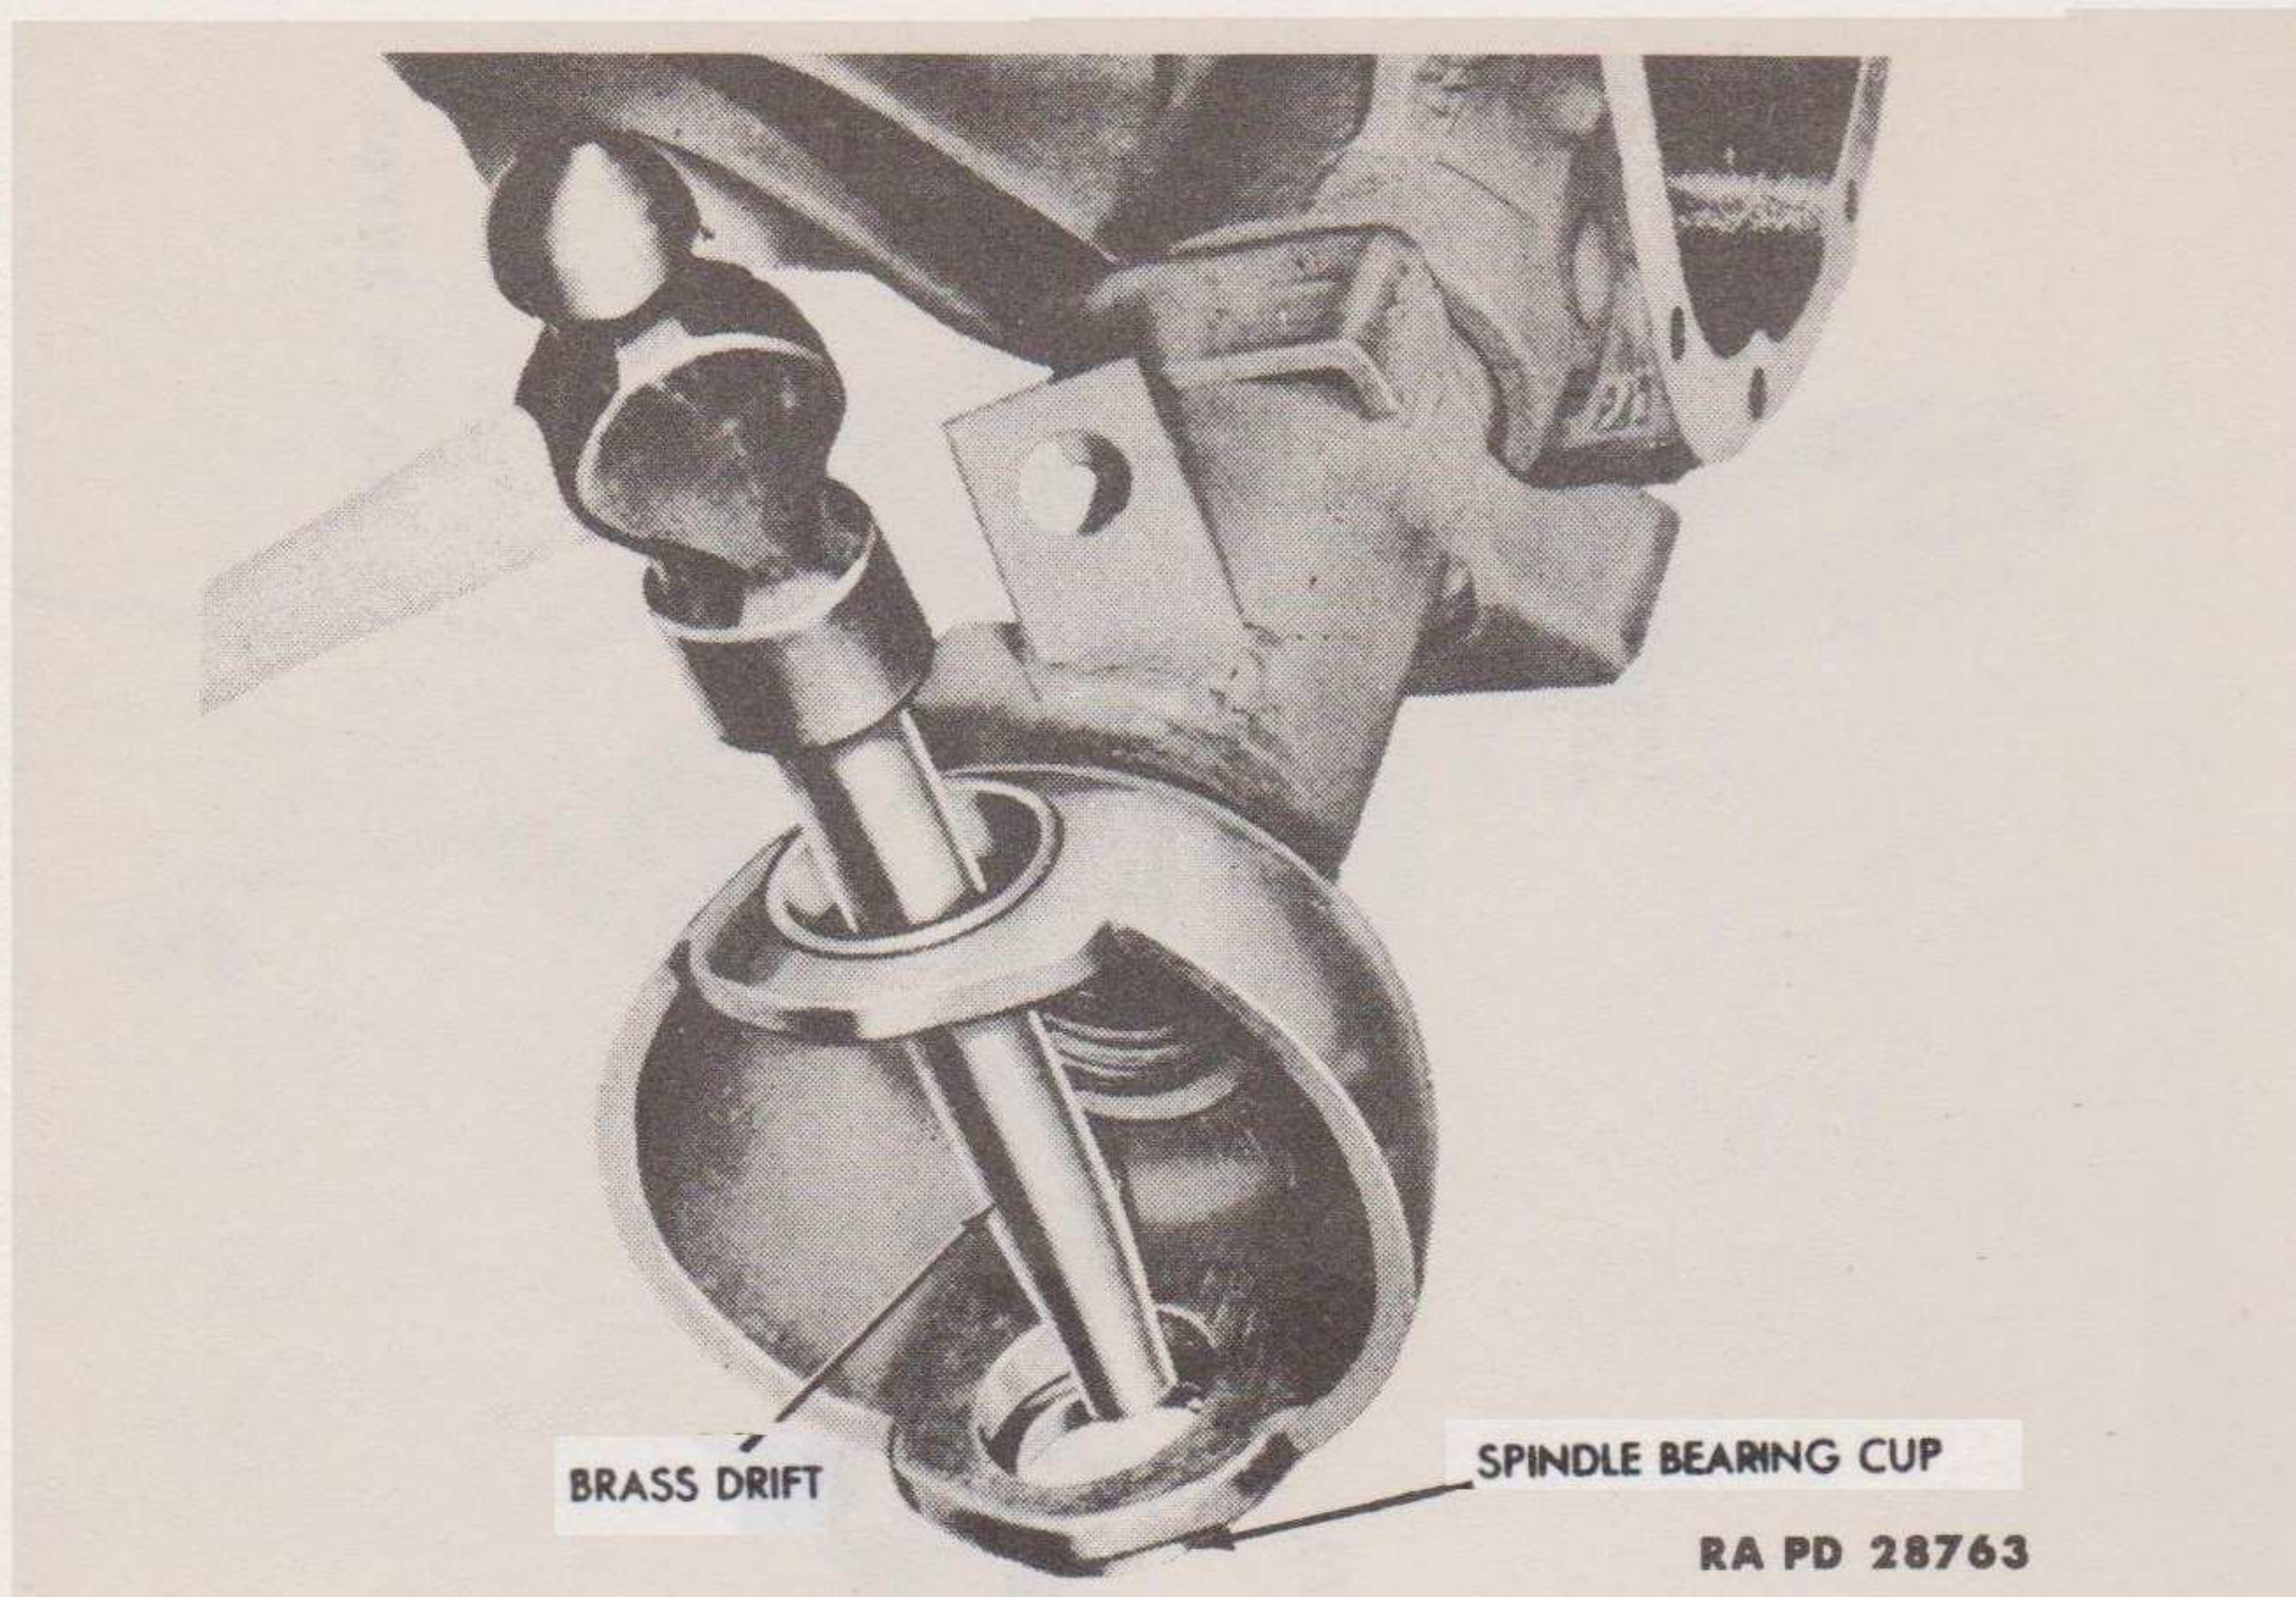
Removing Spindle Bearing Cup From Axle Housing
